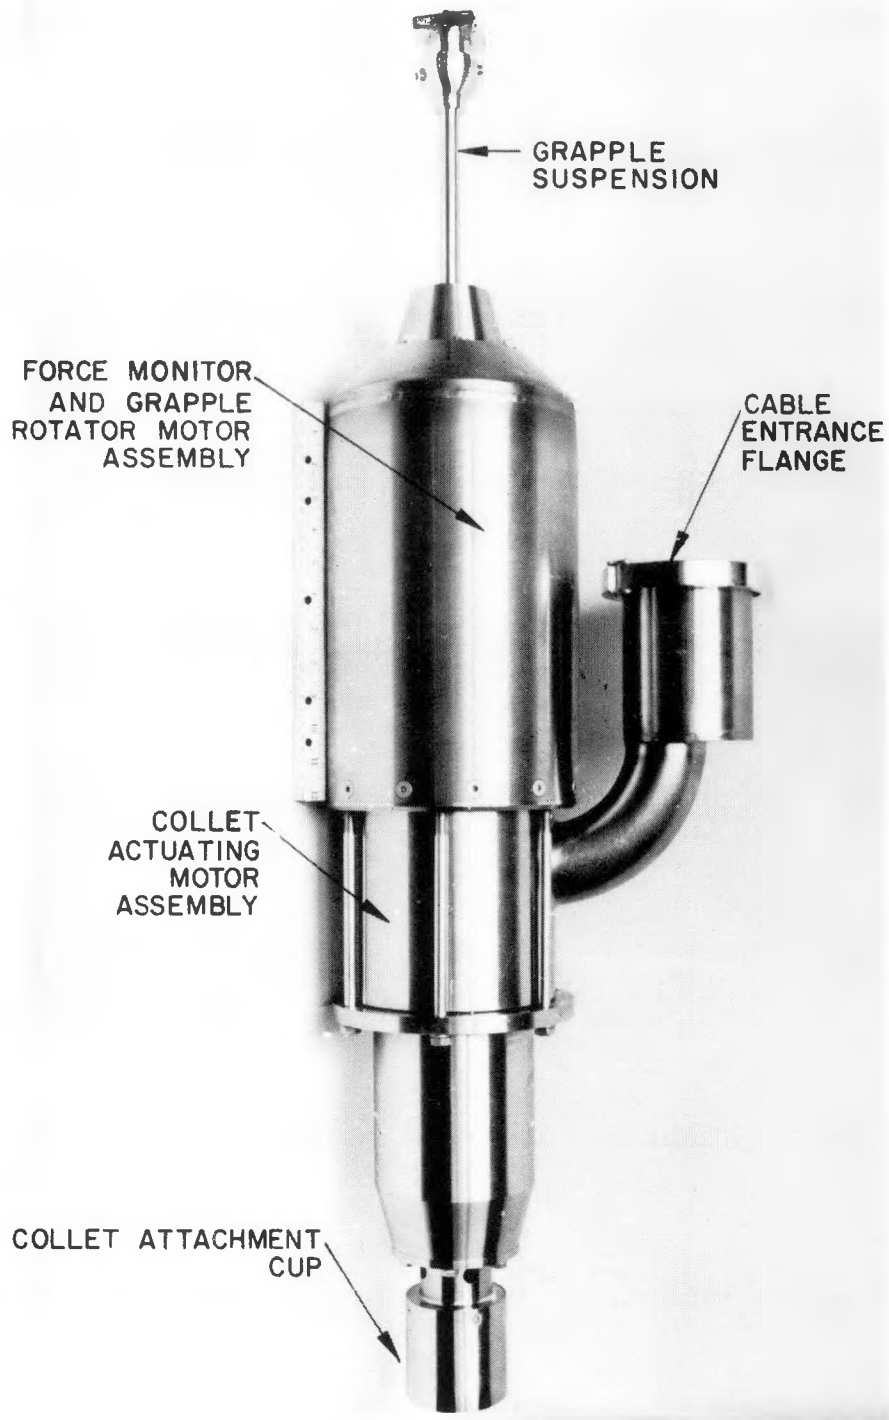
RRS Grapple Motor Assembly (Collet Not Shown)
